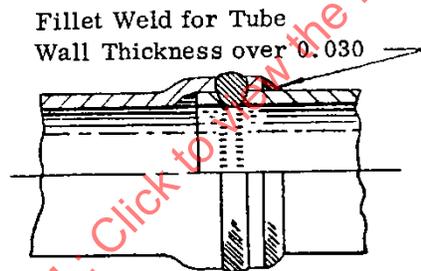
BELLMOUTH WELDED JOINT
